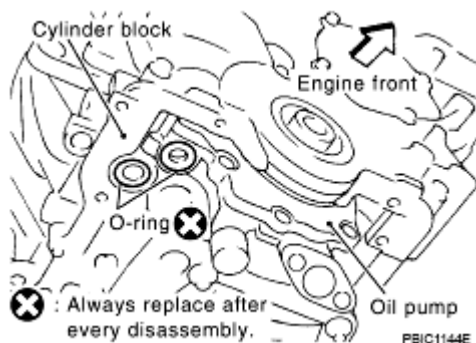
Identifying O-Rings On Bottom Of Cylinder Block
